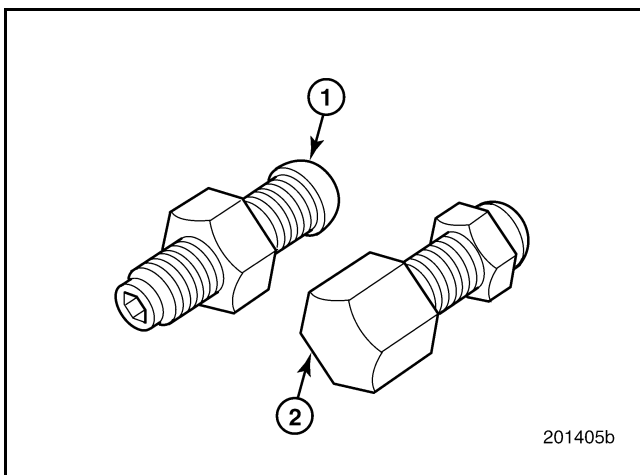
Rocker Arm Adjusting Screws and Nuts
